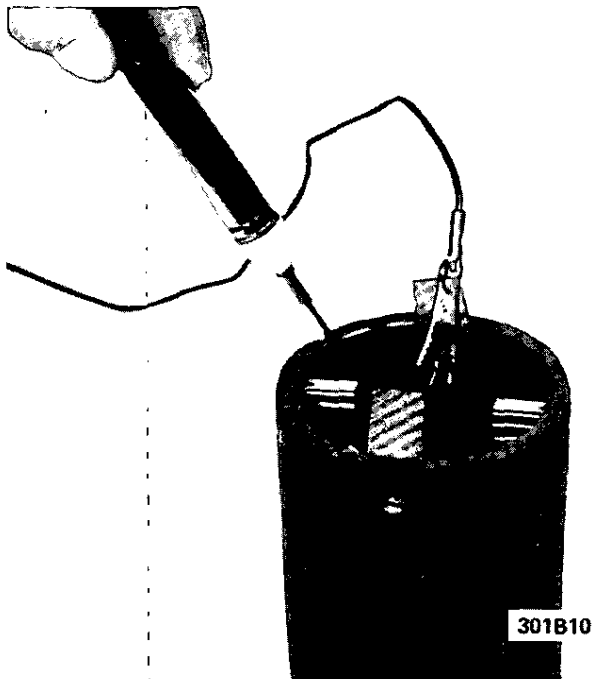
B-10 Checking Positive Brush Holder for Grounds
